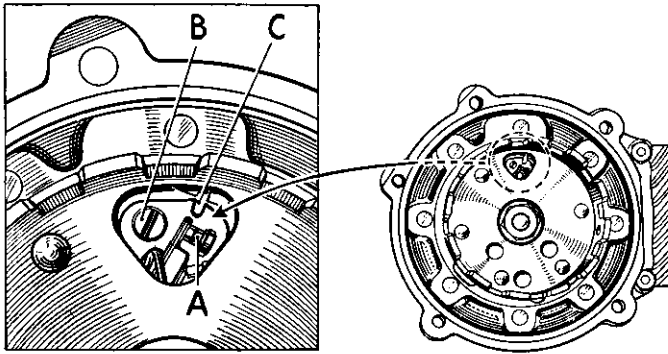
Adjusting the Contact Breaker Points (Lucas).
